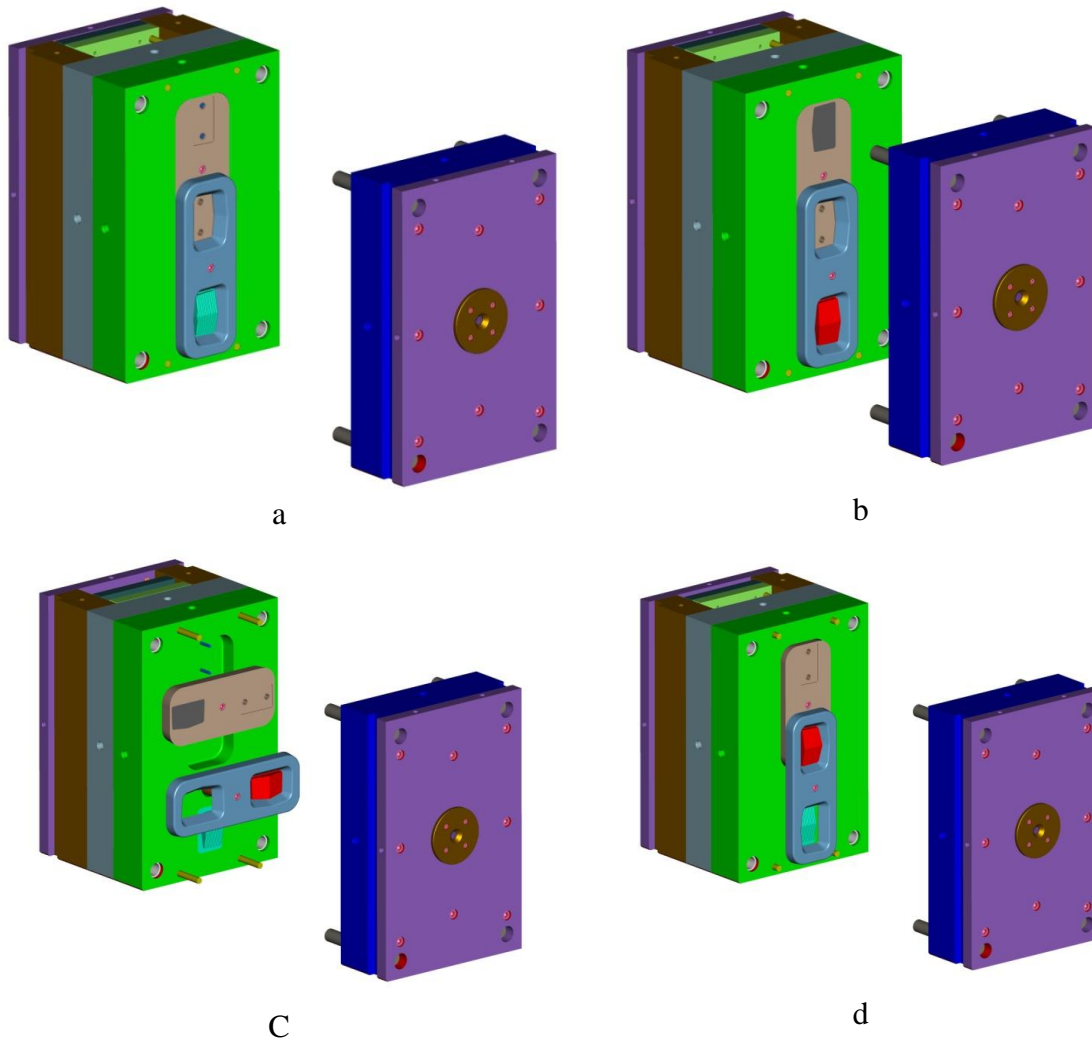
Process Tasks (a: mold open; b: injection of all components; c: rotation of the plates; d: in-mold assembly)
